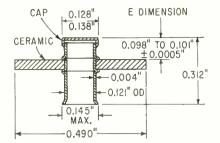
Standard disk cathode showing F dimension. Tolerances of other dimensions vary from 0.0005 to 0.010 inch
